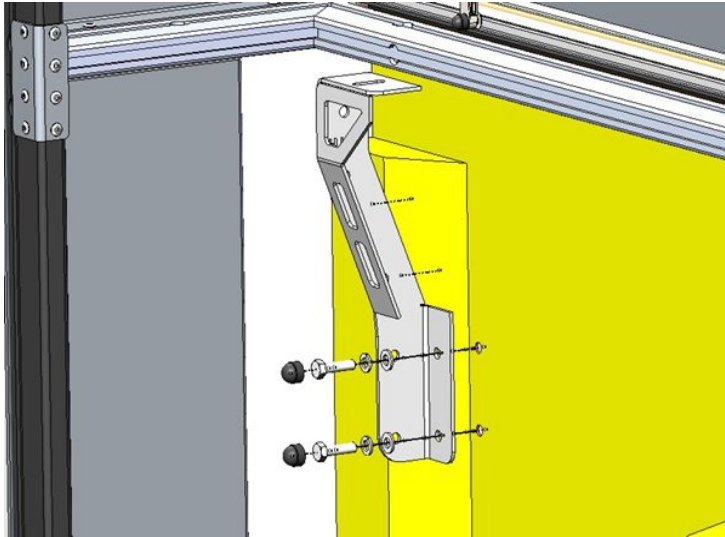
Position Rear Riser Bracket and fasten with M8x30 hex head bolts, washers, nyloc nuts and nut cap over existing holes. Spring Washers on top of the Flat Washer and finish off places the nut caps on the hex bolts
